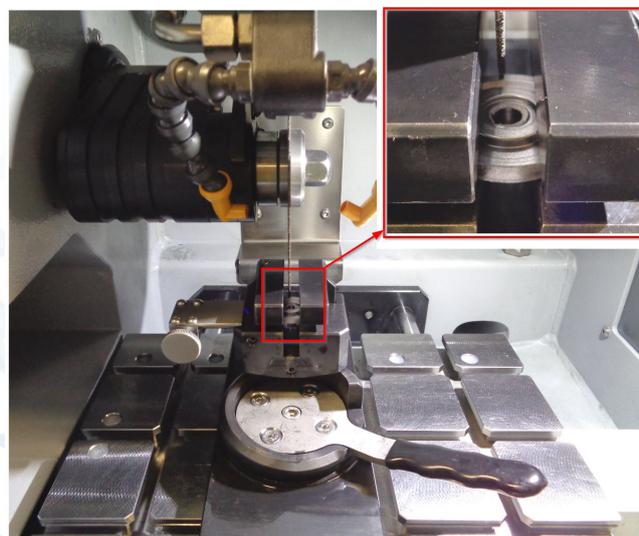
Brilliant 220 machine setup. Detail: clamped sample (clamping tool: vertical vice single).
